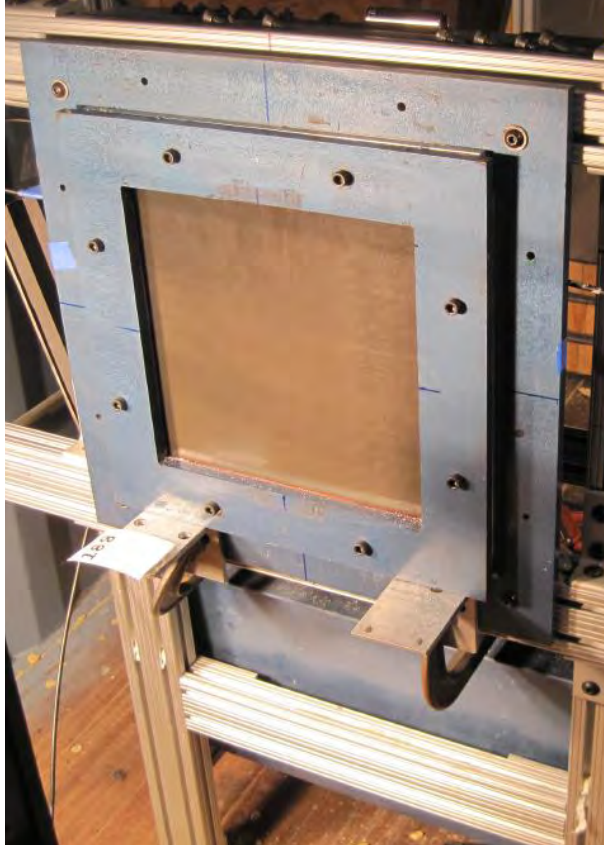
Composite Panel Mounted in “Picture Frame” Fixture
